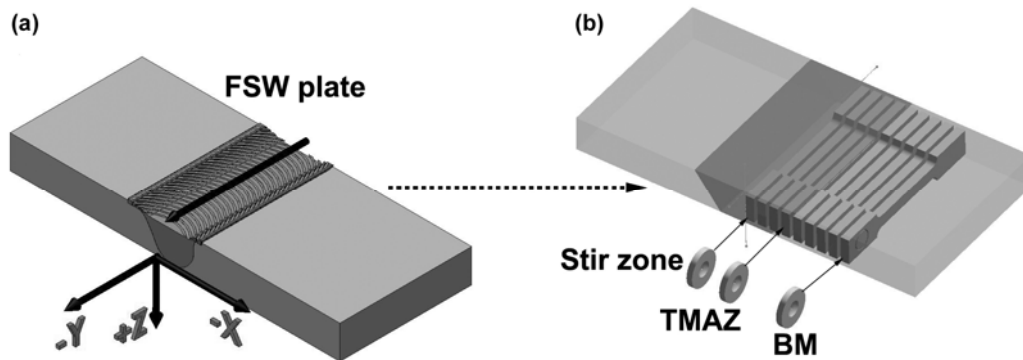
Schematic illustration of the friction stir welded plate and the disposition of TEM specimens obtained from the microflat tensile specimens, located in different weld zones and base material.
